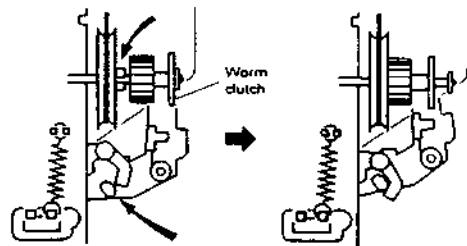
(a) Not locked Fig.1-1-8(b) look engaged
